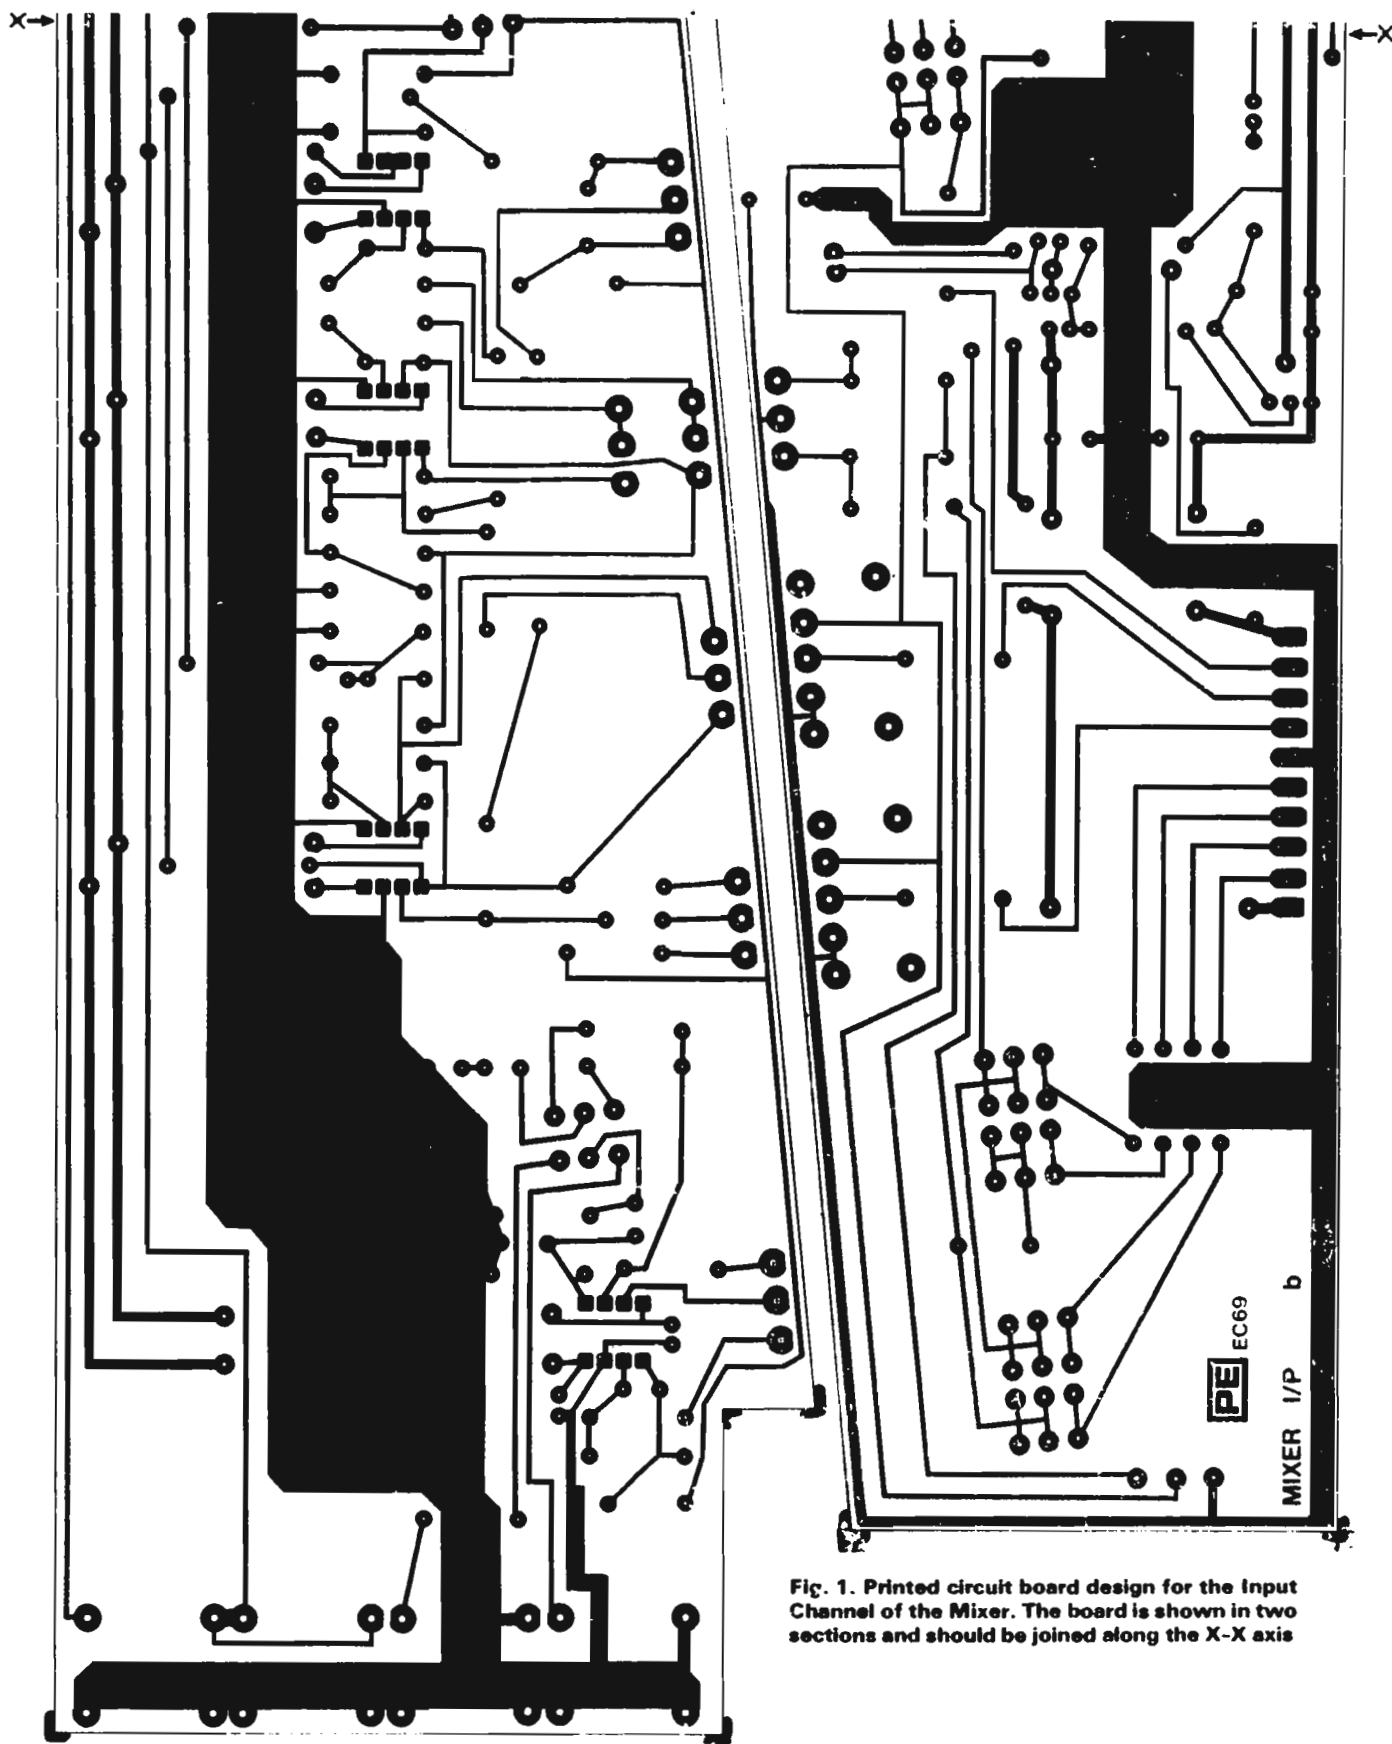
Printed circuit board design for the Input Channel of the Mixer. The board is shown in two sections and should be joined along the X-X axis
